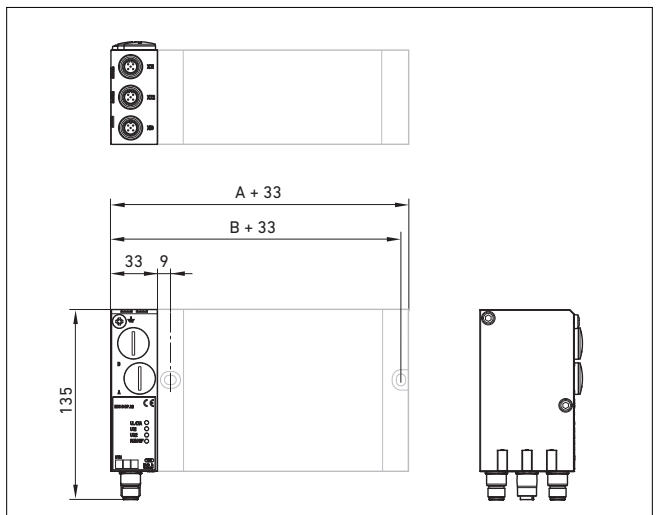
Dimensioned drawing of the valve system (bus coupler and valves)
